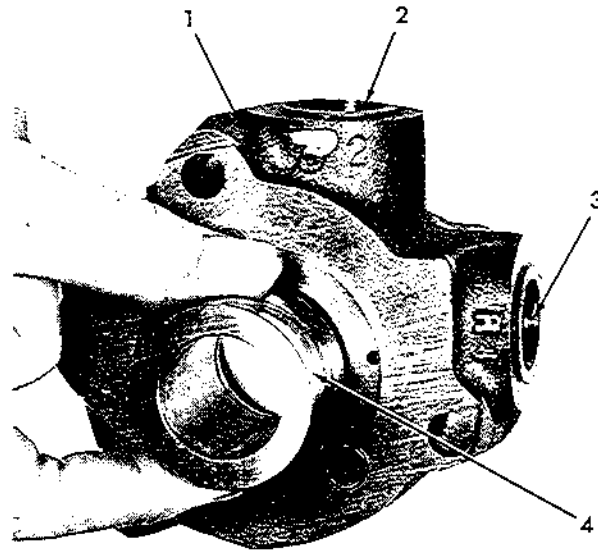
REMOVING VALVE SPOOL FROM HOUSING T-71765
